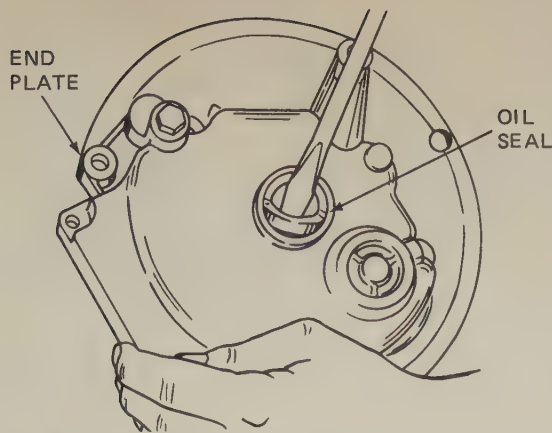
Removing oil seal from the crankcase end plate. (Tecumseh Products Company)
